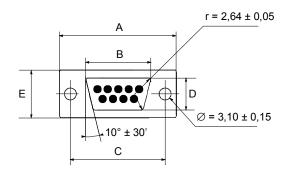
External fixed (device) side connector for typical industrial environments: dimensions
